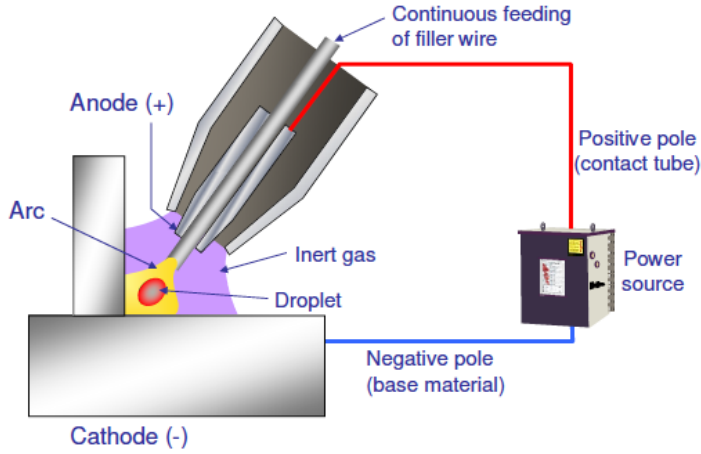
Metal inert gas welding method (Myhr, 2013).
